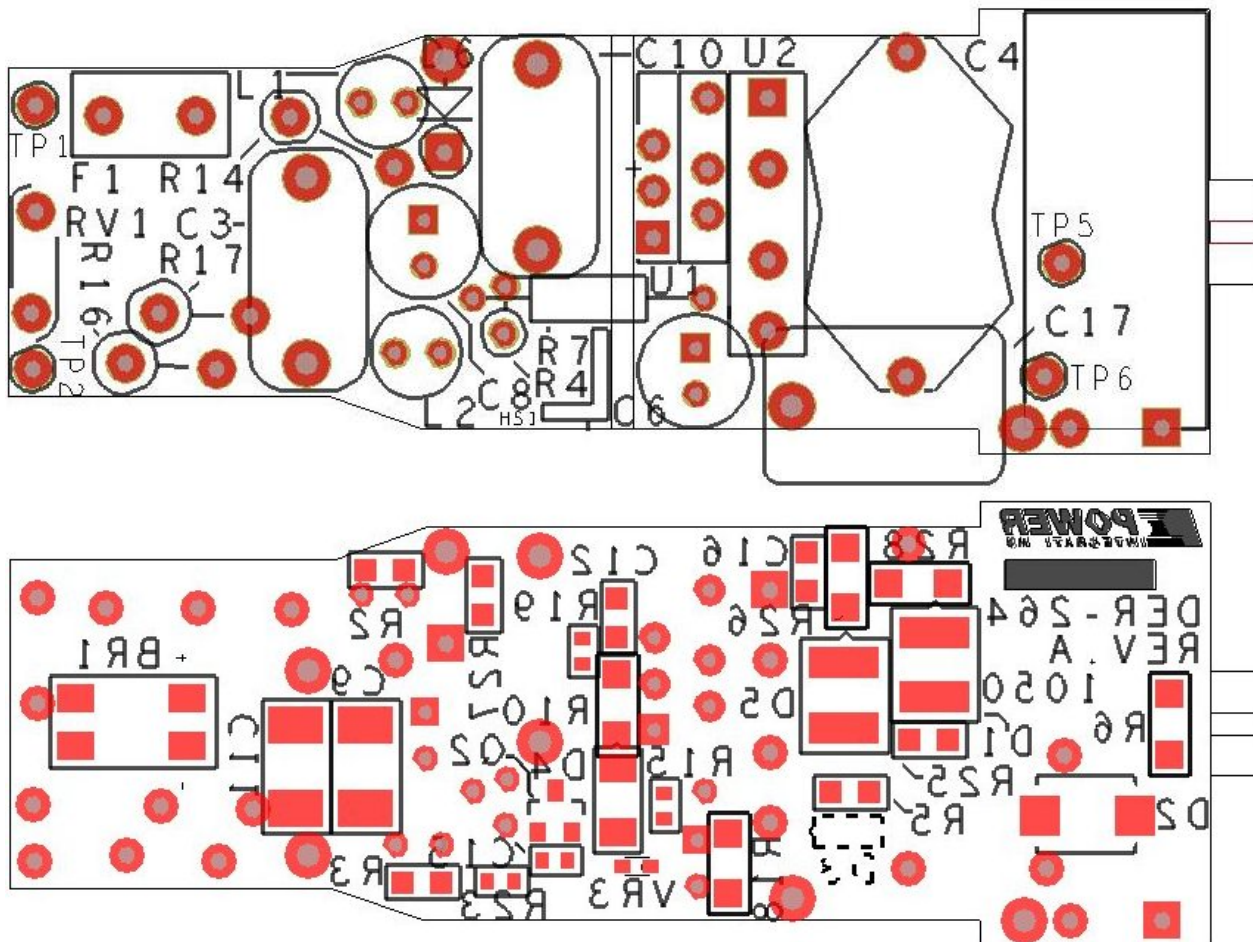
Printed Circuit Layout, Top and Bottom Silkscreen.
